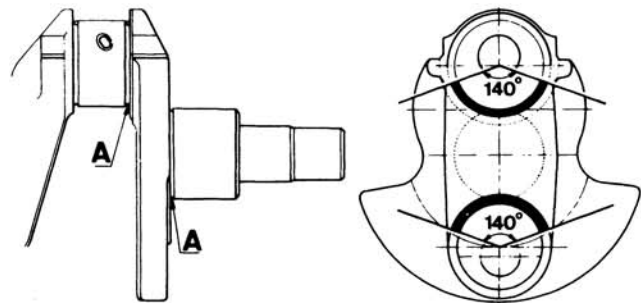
CRANKSHAFT UNDERCUT "A"
